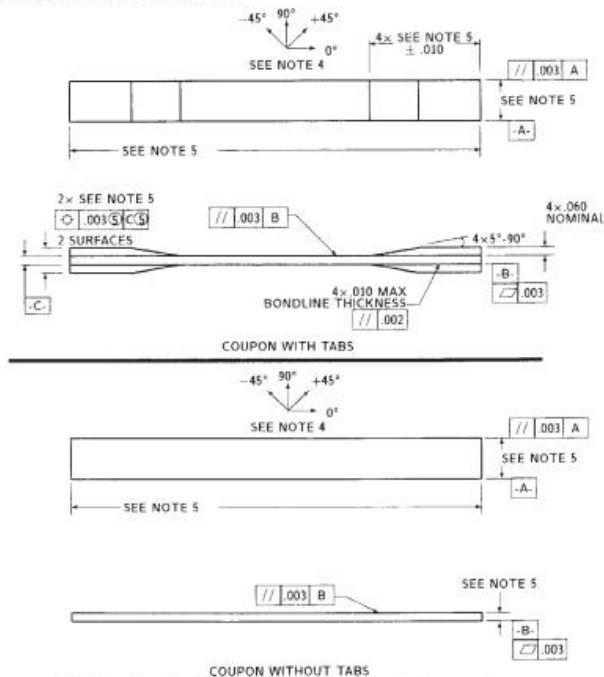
Tension Test Specimen Drawing (Inch-pound)
